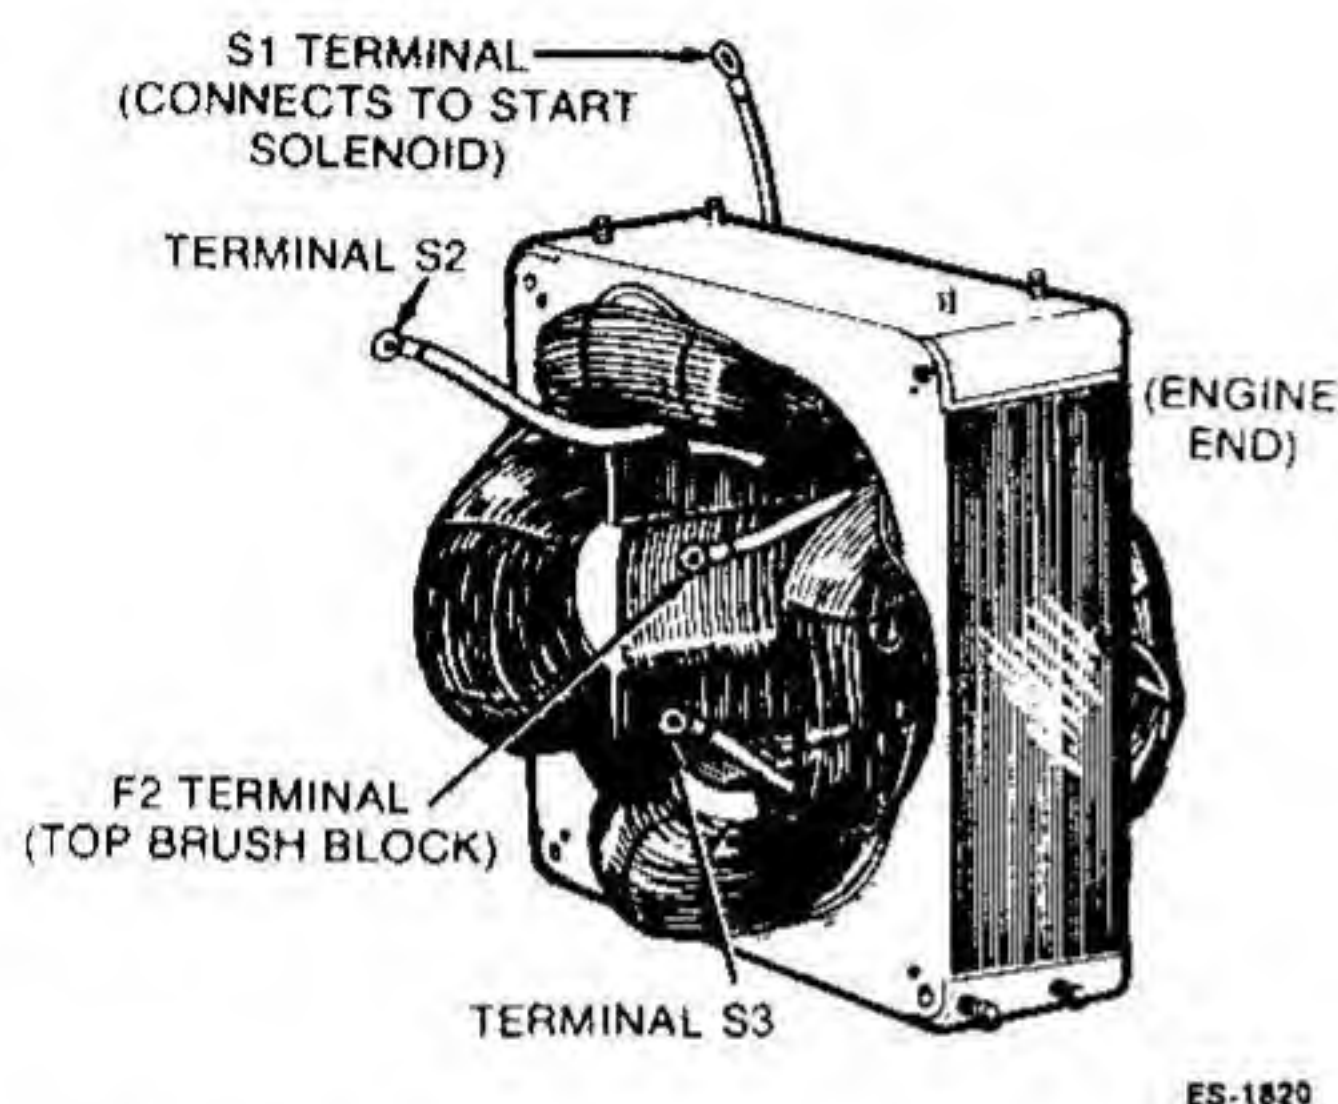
GENERATOR FRAME (WOUND STATOR) ASSEMBLY
